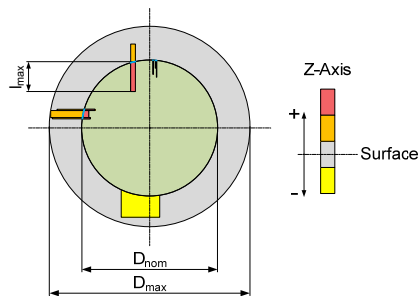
left: schematic view of a machined hole and the associated defects; right: legend of contour levels
